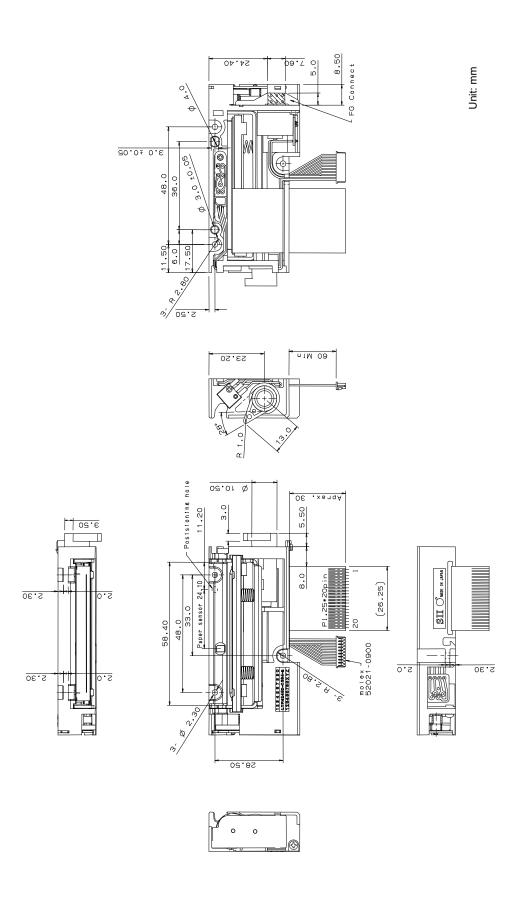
Printer Main Body Appearance and Dimensions (LTPH245D-C384-E)
